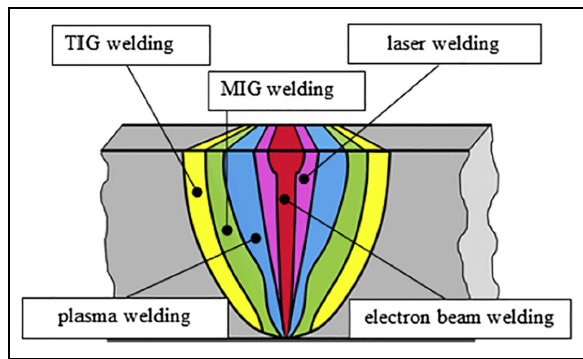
Comparison of the weld bead shape produced by fusion welding technologies.³¹
